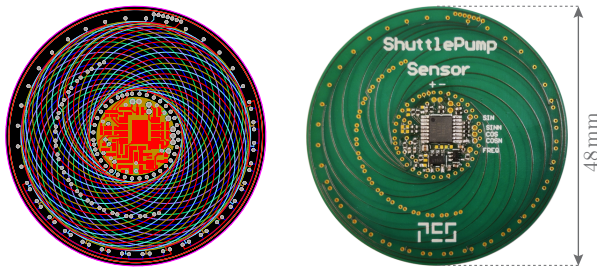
Multi-layer-PCB-embedded linear-rotary ECS. (a) Layout details (*Altium Designer*) with distributed shifted turns and (b) realized hardware prototype.
